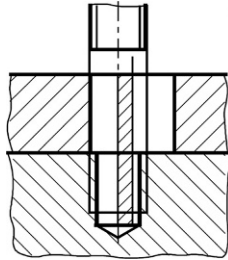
Position tolerance zones of threaded hole and through-hole
